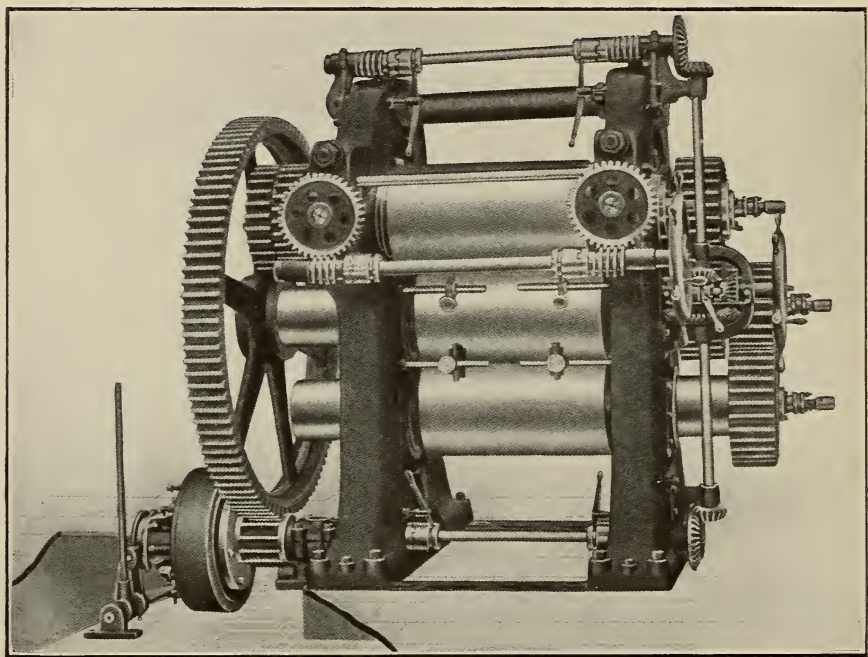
FOUR-ROLL ENGRAVING CALENDER.
